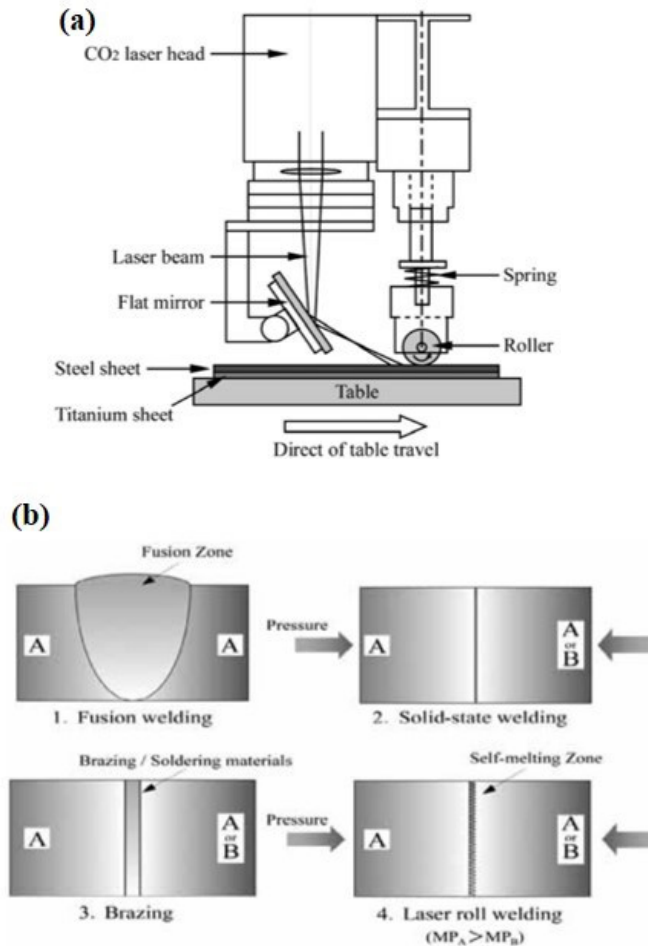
A schematic diagram of (a) the laser roll welding and (b) comparing the weld appearance of some joining processes [12].
